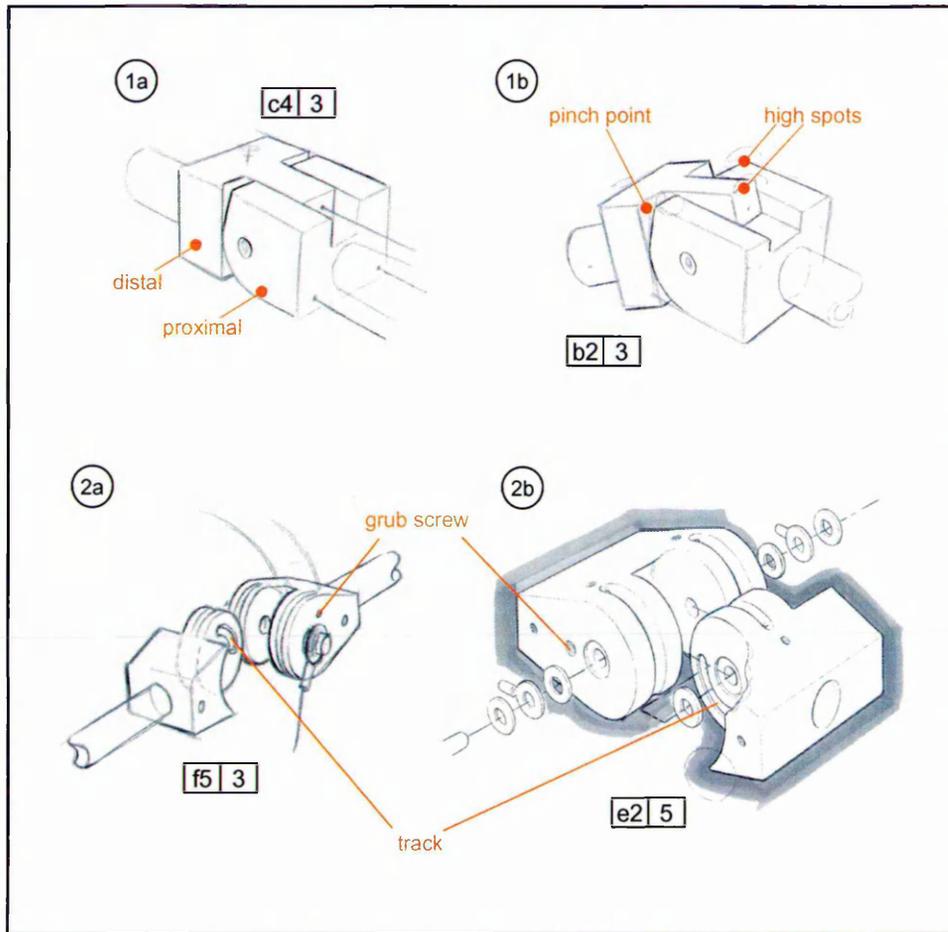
Detail Sketches of Tenon Joint Ideas
